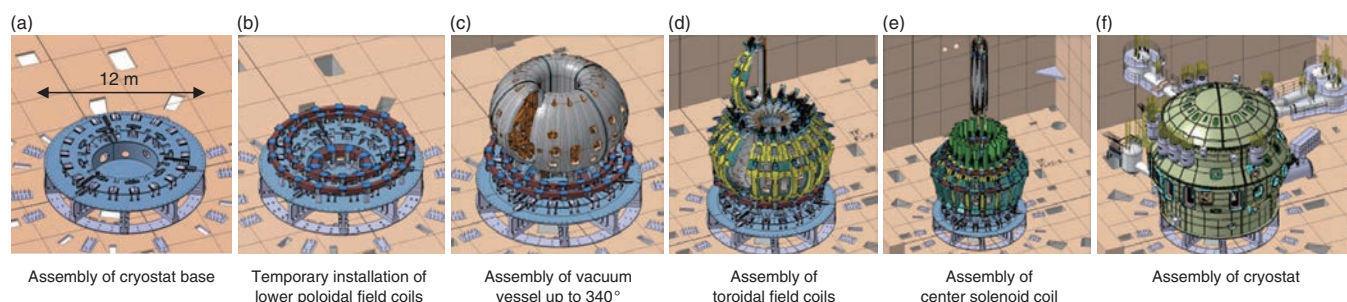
Major assembly sequence of JT-60SA tokamak
